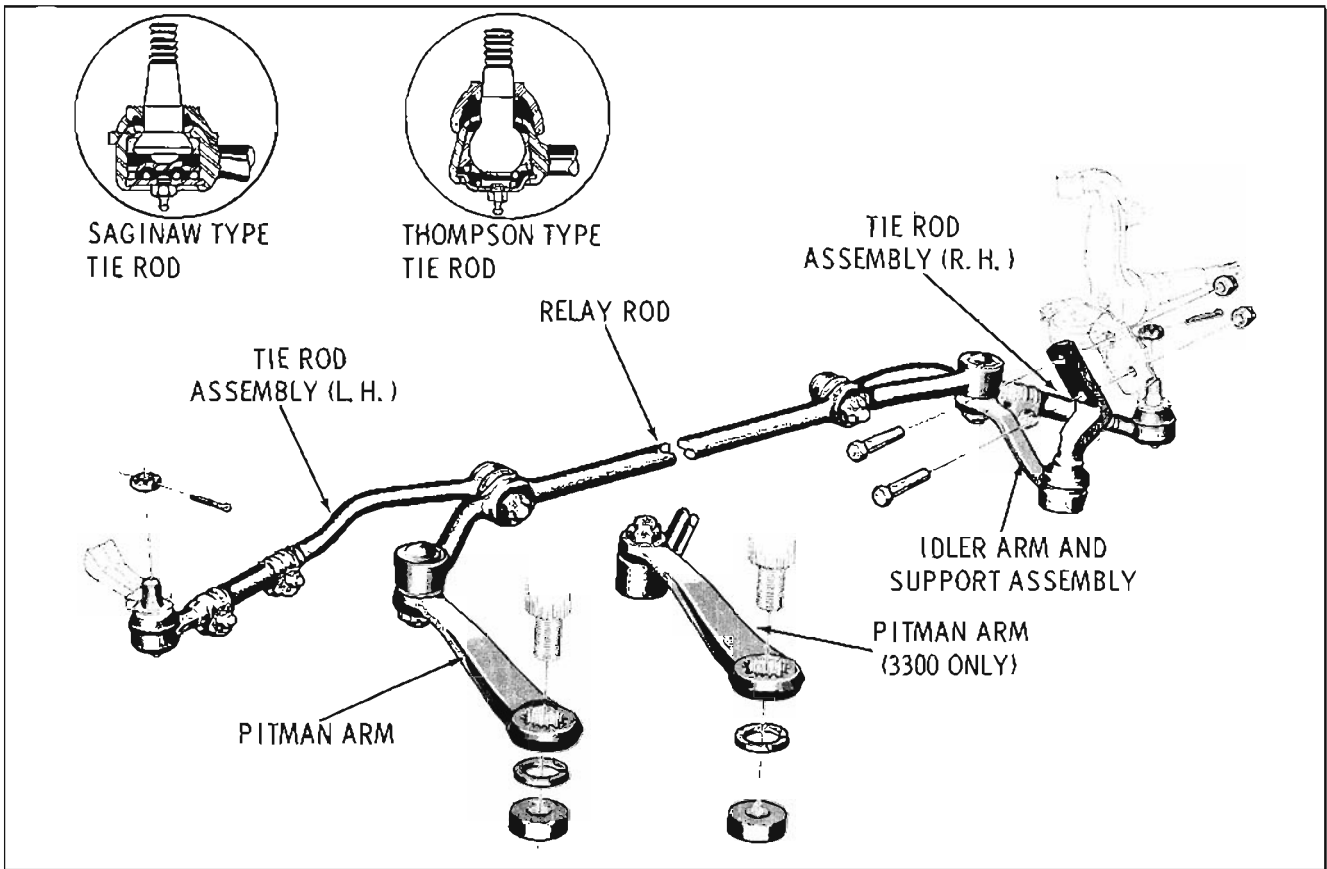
Steering Linkage (33 - 34 - 35 - 36 - 38 & 39 Series)
